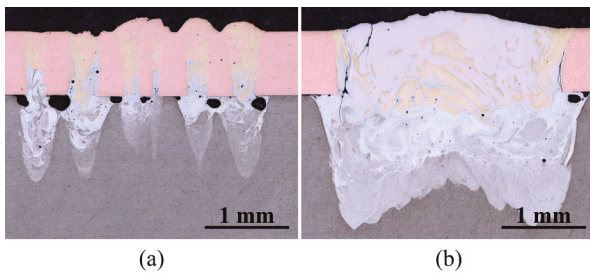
Weld beads with fragmented (a) and fully unified interface (b)
